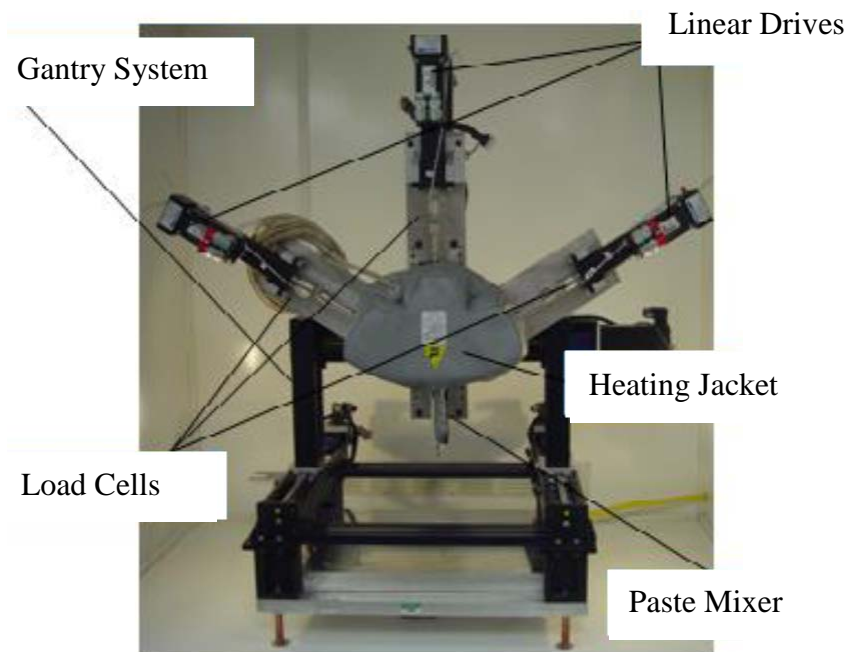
FEF MACHINE WITH TRIPLE-EXTRUDER MECHANISM [51]
